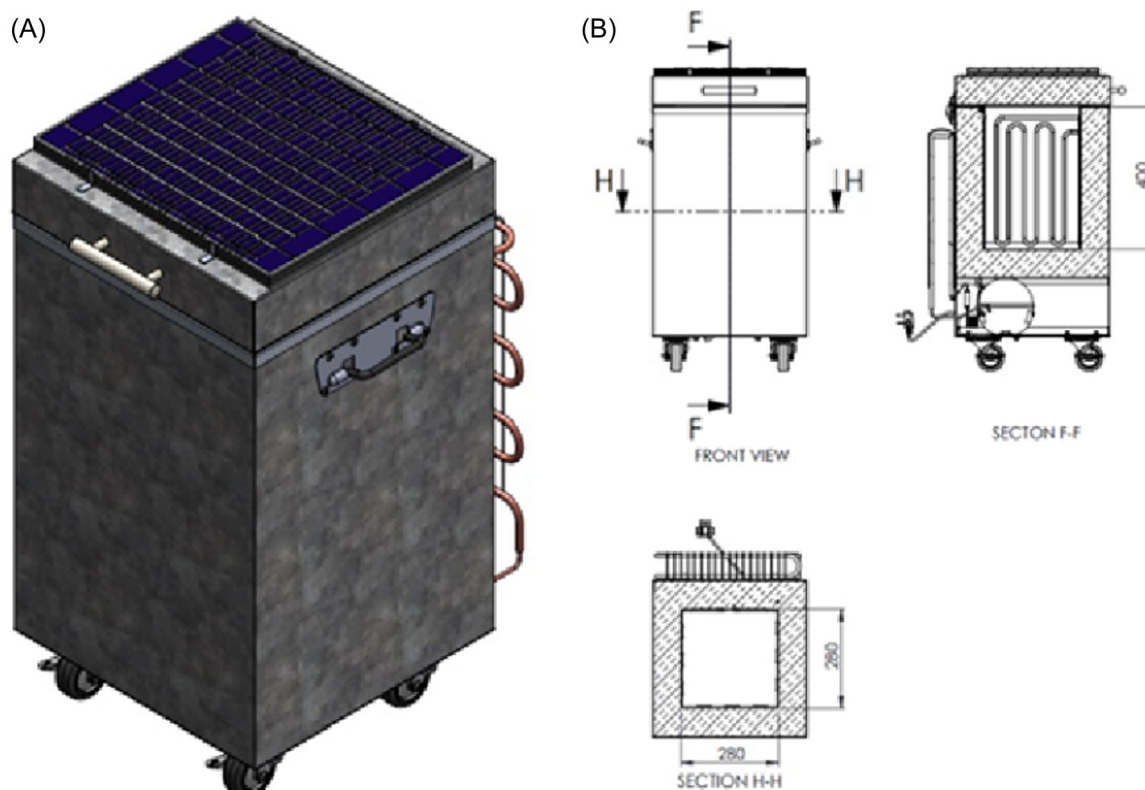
Assembly vaccine cooler. (A) Folded placed at the top of the cooler. (B) Cross section view.
